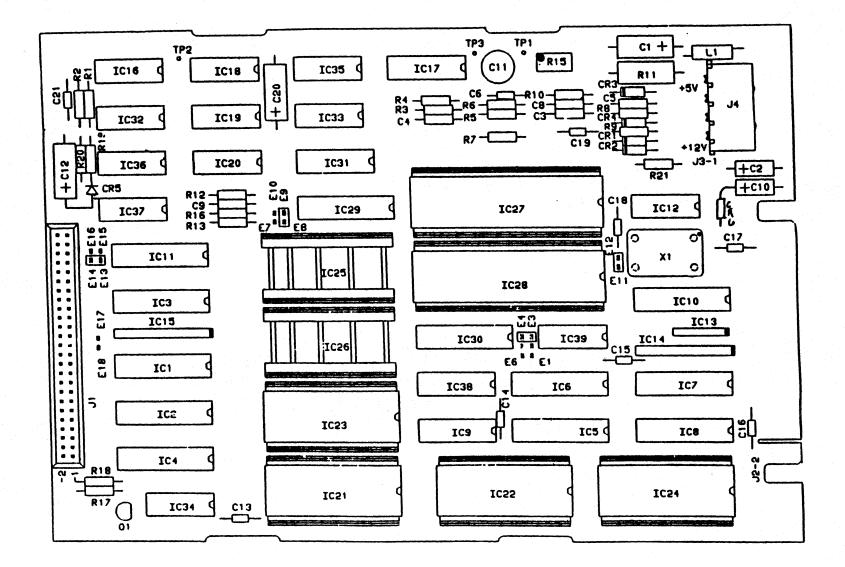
SINGLE BOARD FORMATTER LAYOUT (SBF-I)
